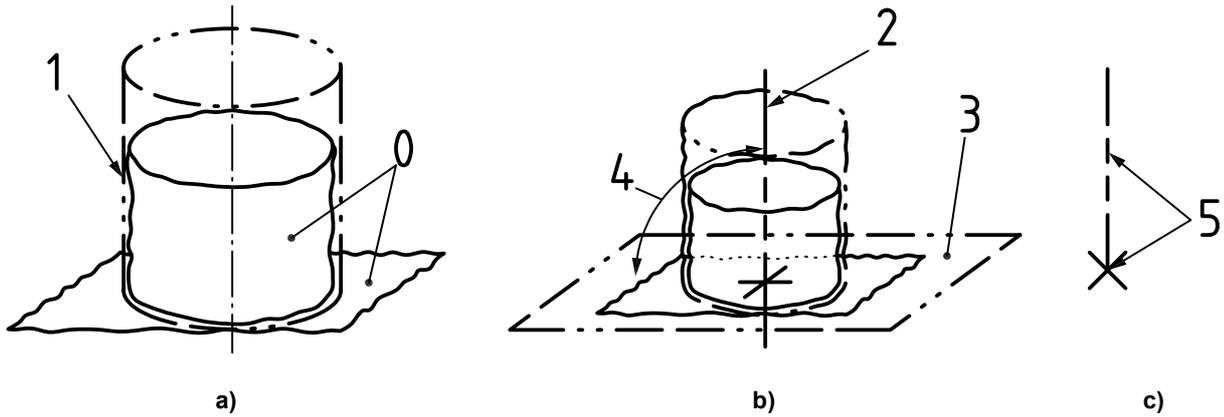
Perpendicular plane and cylinder — Set of two real integral surfaces
